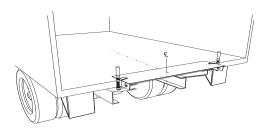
Press, bolt or spot-weld the mounting jig to the rear beam
